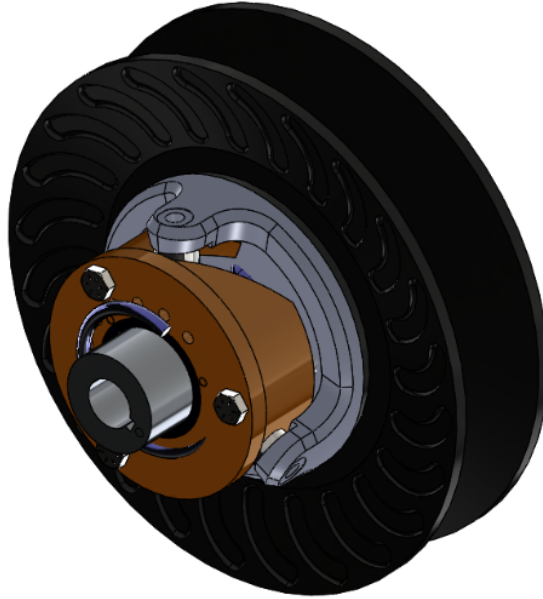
Secondary CVT assembly showing the helix mechanism and spring. Torque τ_s transmitted through the belt produces tangential force at the helix ramps, which is redirected into axial clamping force.
